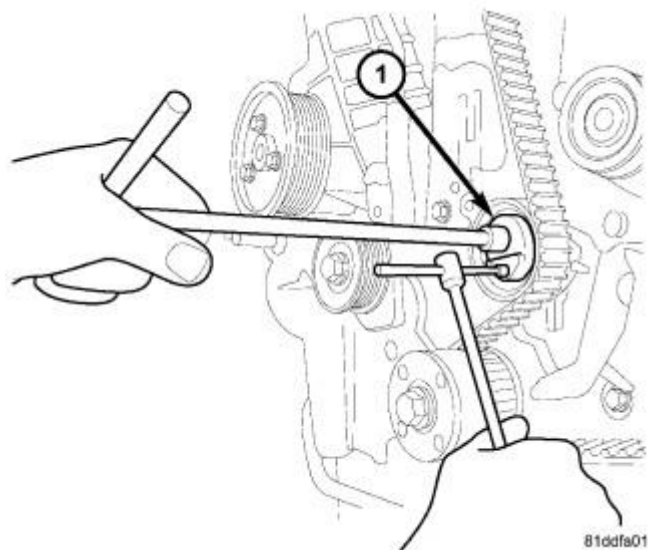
Tighten/Loosen Timing Belt Tensioner Bolt
